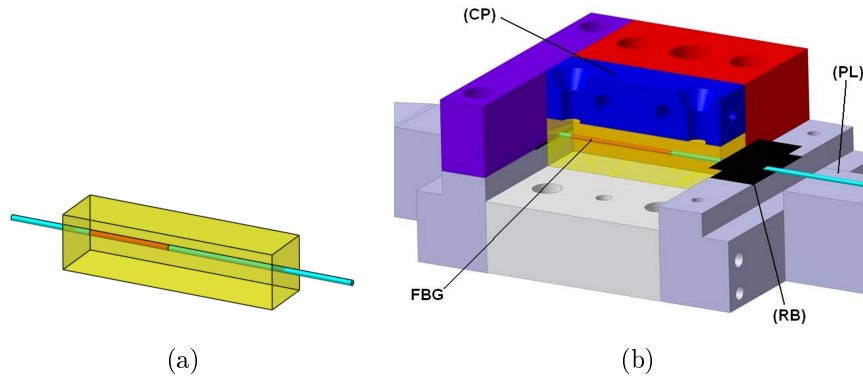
Rectangular epoxy sample (10x10x40 mm) with embedded FBG (a) and mould for specimen preparation (b): RB: rubber stripes; PL: plane to support the fiber; CP: cap with openings.
